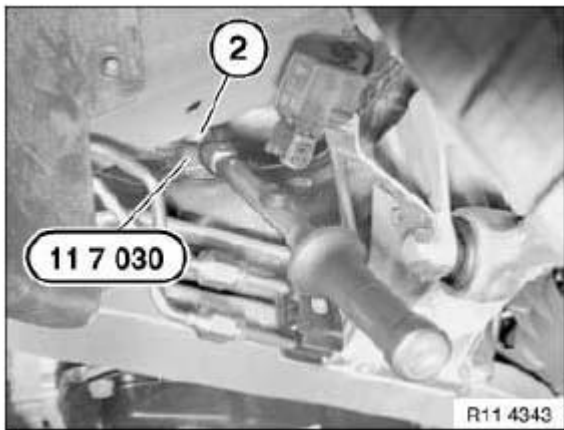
Identifying Special Tool (11 7 030) On Control Sensor
